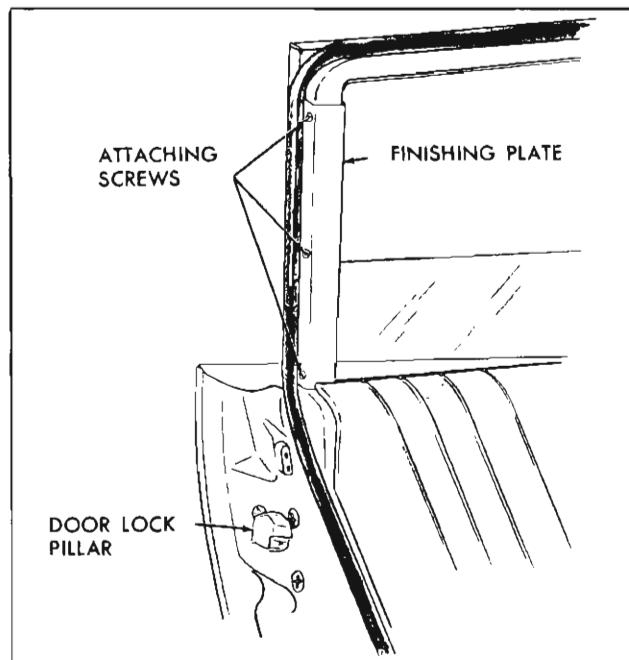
Rear Door Belt Support Finishing Plate—35 and 45 Styles
